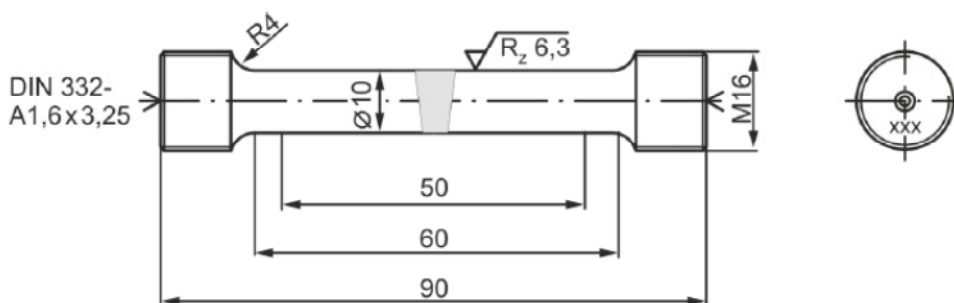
Relaxation test specimen extracted from welded plate
